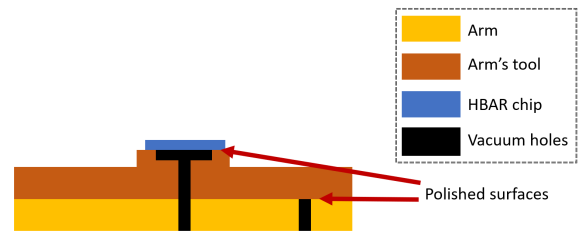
The arm is equipped with two kinds of vacuum holes, the first one grabs the tool while the second one passes through the tool to pick the chip (HBAR chip in our case).
